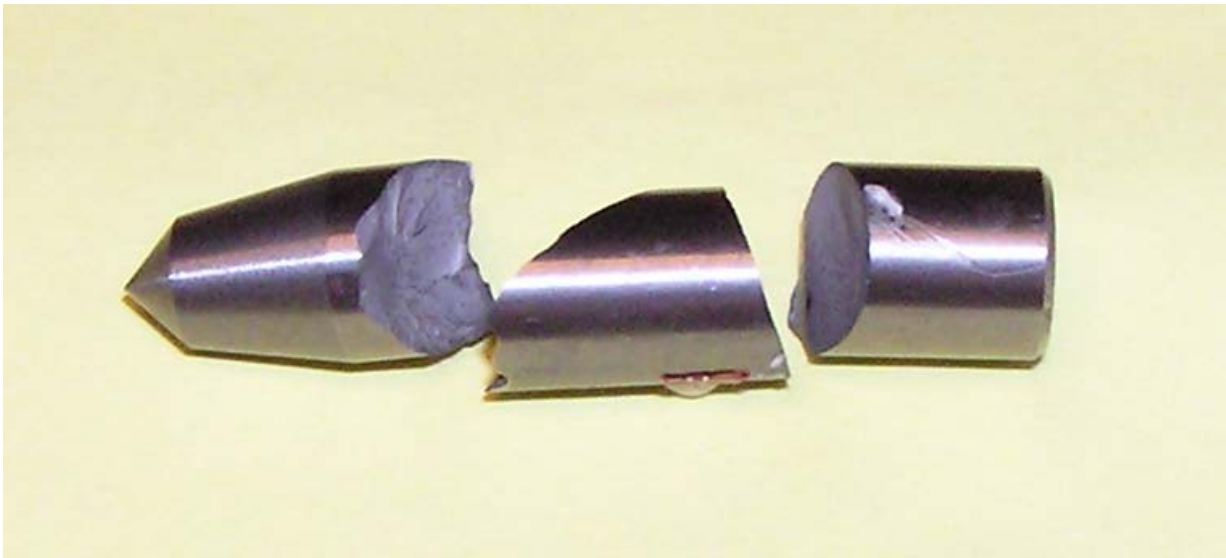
The hardcore test specimen ($d=10$ mm) after fracture due to bending.
